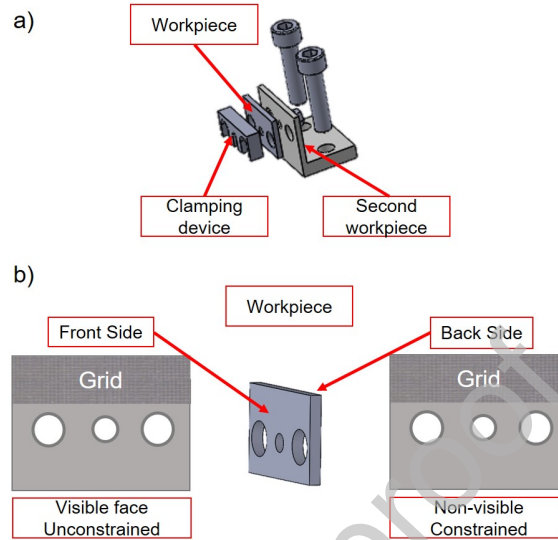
Scheme of the set-up to obtain plane strain conditions. a) Clamping device, workpiece and second workpiece; b) Focus on the workpiece with the grids.
